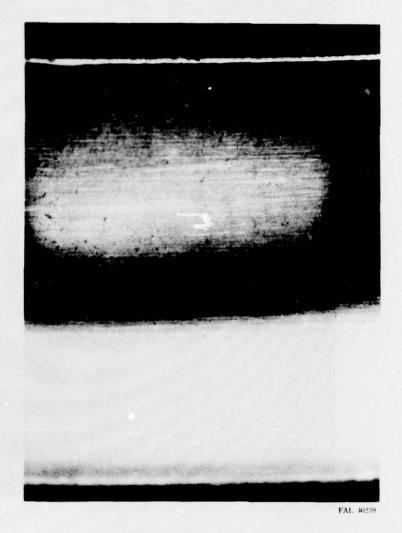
Lower Towershaft Bearing Inner Race Contamination Damage Magnified 15 Times
